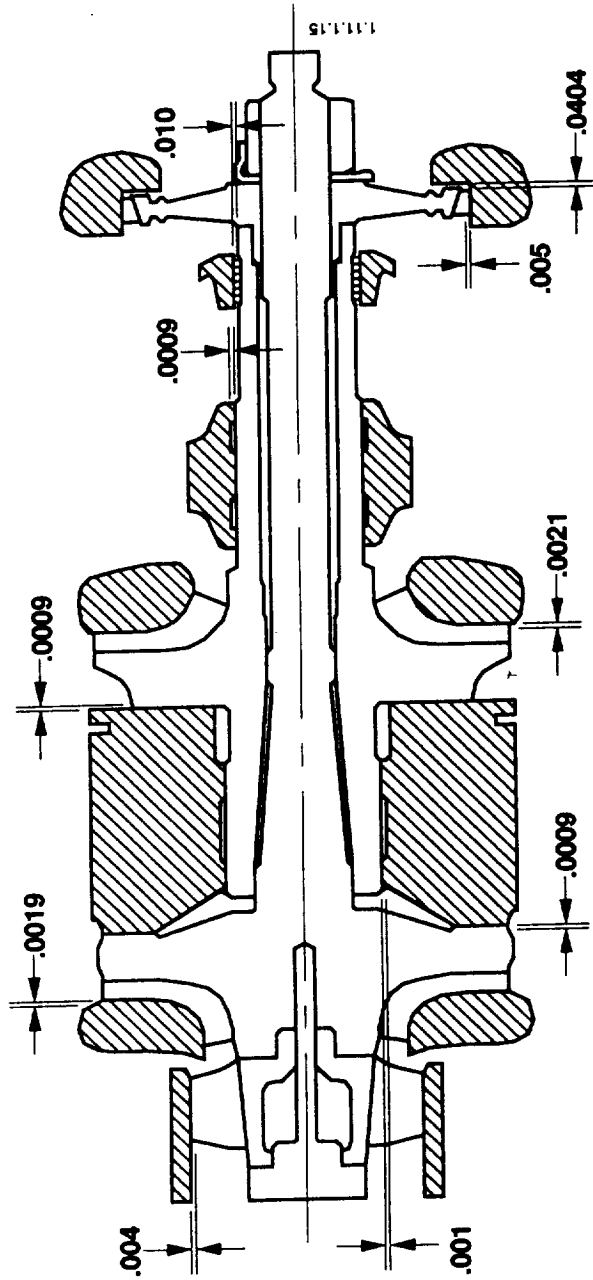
Nominal Assembly Clearances Between Rotating and Stationary Parts
